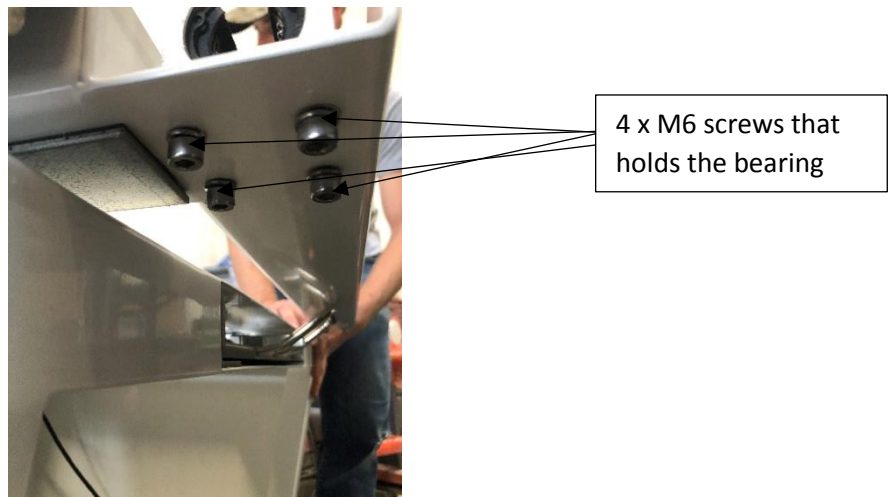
4 screws from the bottom that holds the ball bearing. It needs to be loosened before inserting the tabletop.
